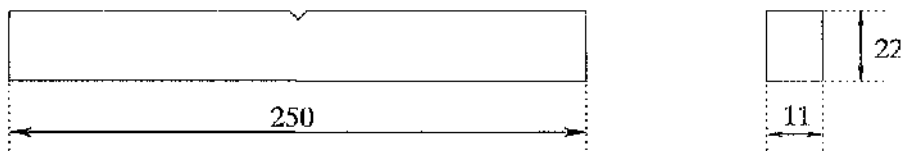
Dimensions (in mm) of the fracture test specimen.
